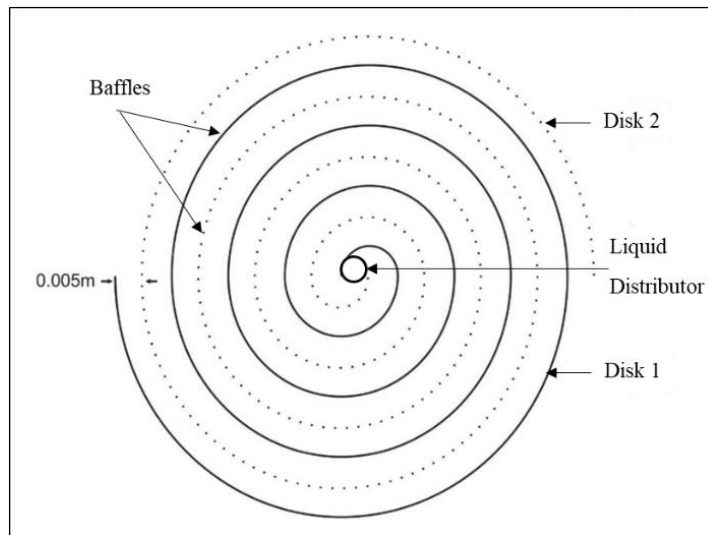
(b): Front view of Rotating Spiral Contactor (RSC)
